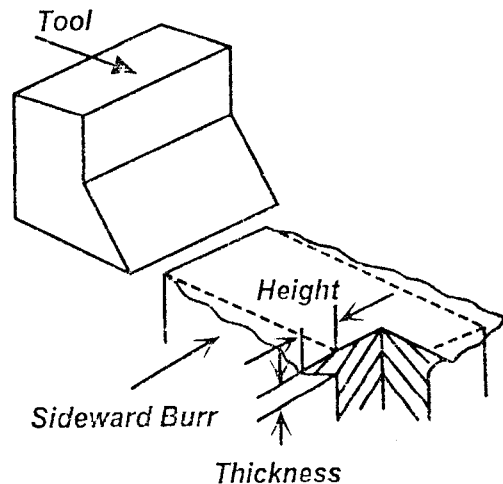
Typical sideward burr formed in orthogonal cutting.
